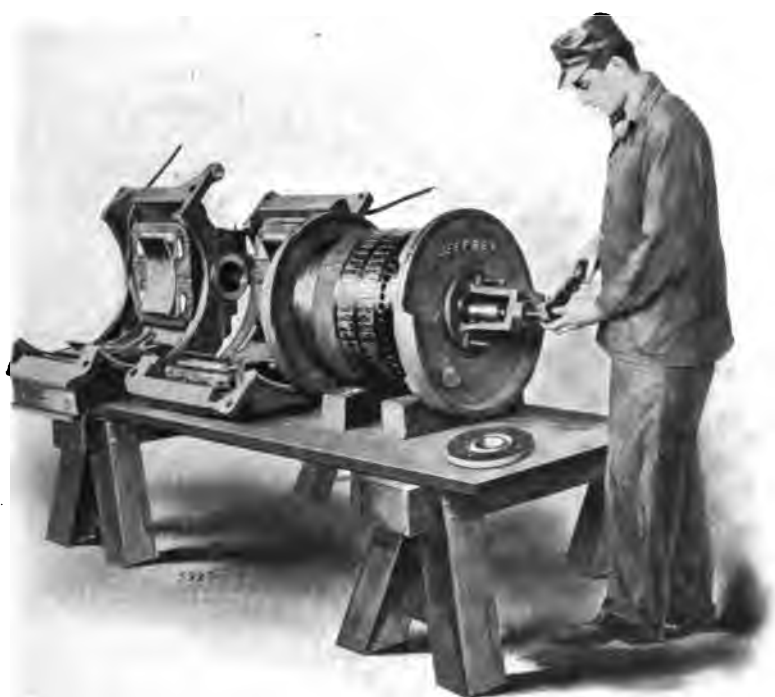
METHOD OF REMOVING BALL BEARINGS.
